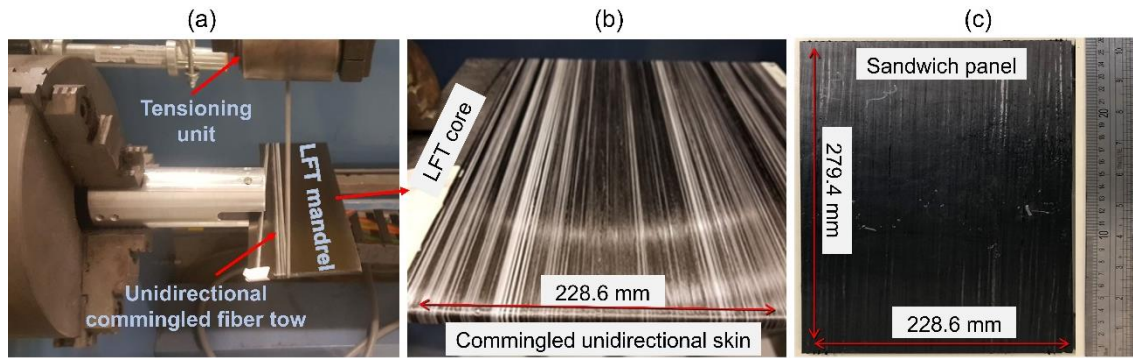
Processing steps of unidirectional commingled fiber overmolded LFT sandwich composite; (a) filament winding setup with a tensioning unit which provides 13.56 N-m tension on tows while being winded on LFT mandrel, (b) one layer of commingled fiber wound with a 2 mm step along 228.6 mm wide LFT mandrel, and (c) consolidated sandwich panel.
